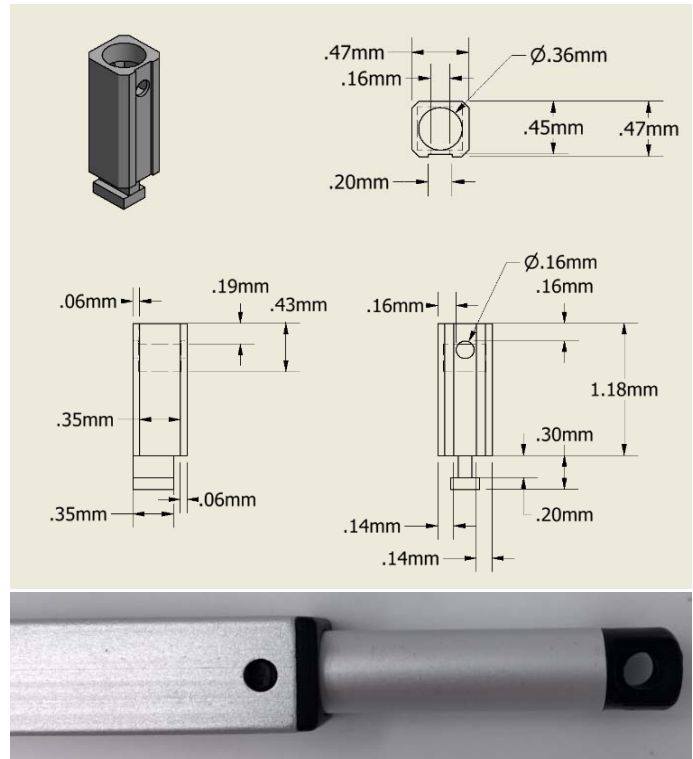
An integration adaptor (upper) for fastening the linear actuator to the device through a hole and pin assembly (bottom) at the end
